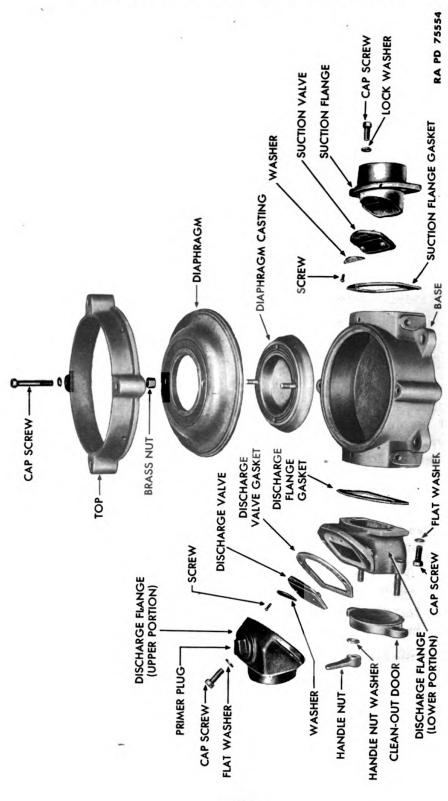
Engine-driven Diaphrágm Pump — Exploded View
